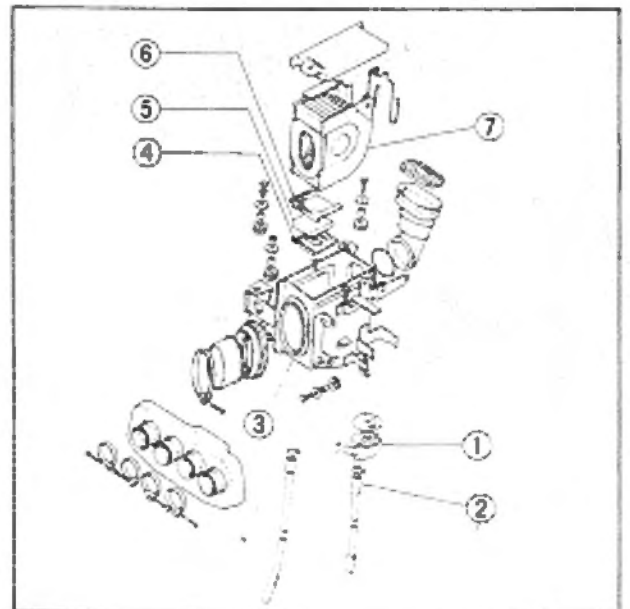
① Breather tube ③ Oil drain tube ⑤ Air cleaner case
